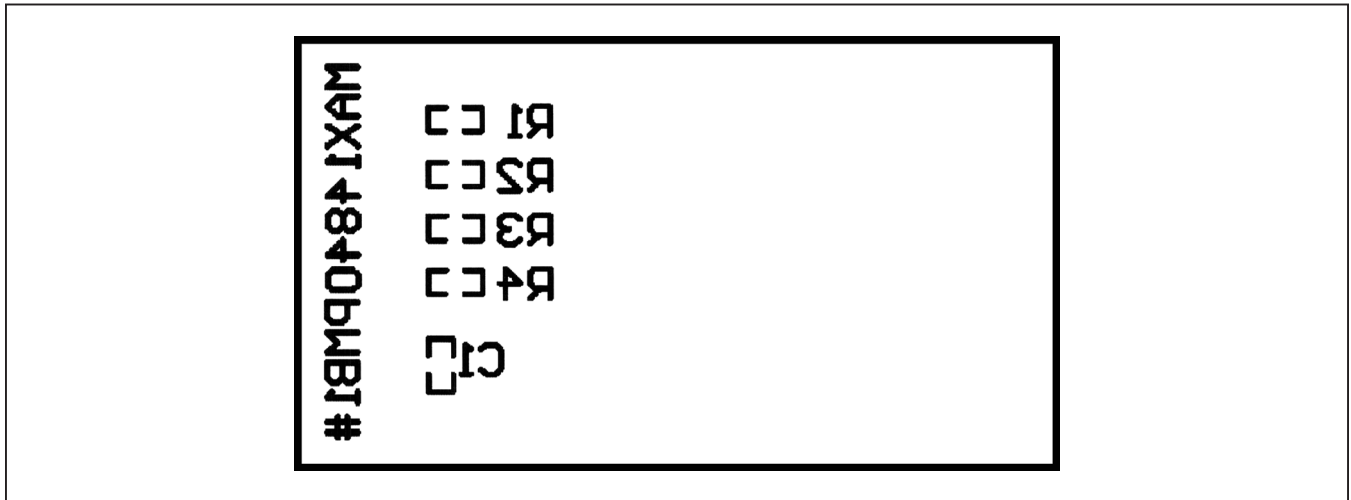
MAX14840PMB1 Peripheral Module Component Placement Guide—Solder Side
